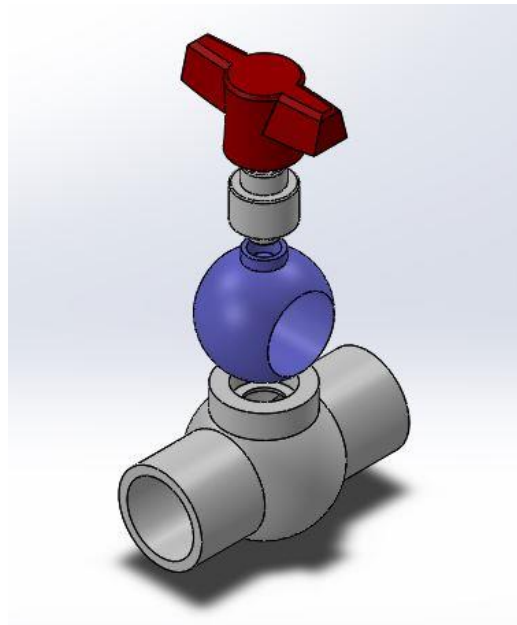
Full SolidWorks exploded assembly view of ball valve in closed position.
